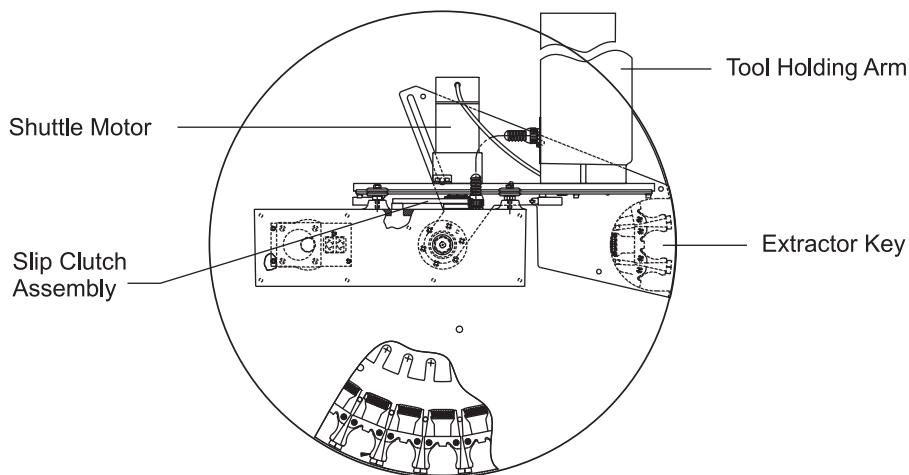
Automatic Tool Changer - Mechanical Assembly (Top View)
